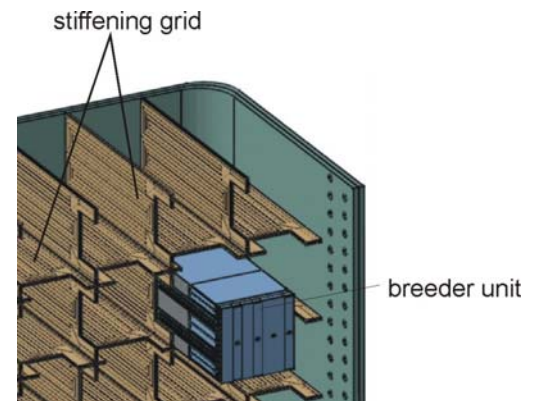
Detailed view of module box, stiffening grid and breeder unit.
